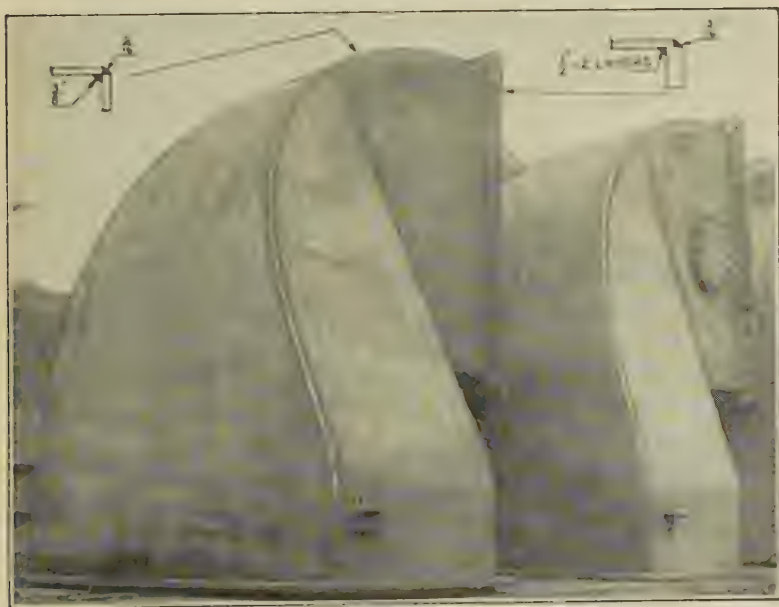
Arc-welded exhaust trunks for steam turbines.
